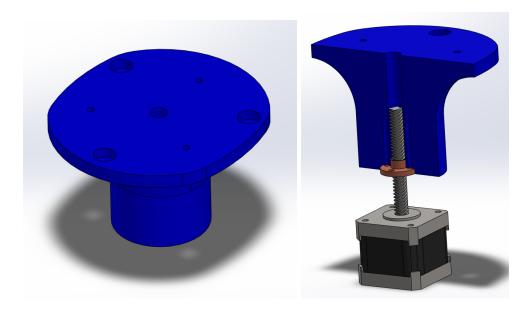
Motor-Plate Connection, Part Section View Showing Lead Screw Travel Space
